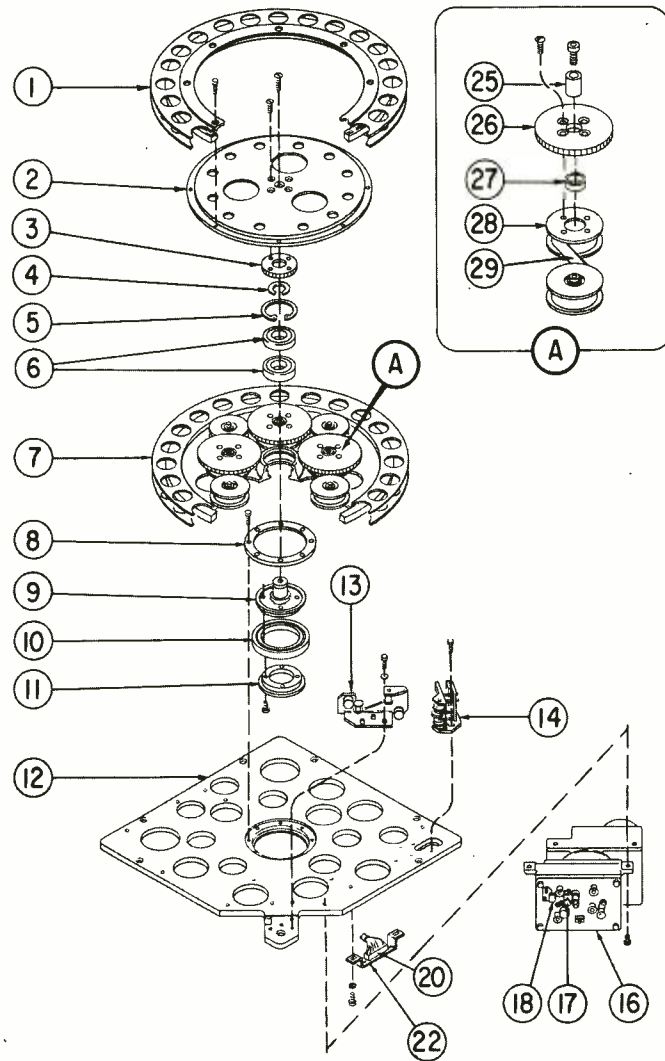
Tape transport assembly; all parts are mounted on a magnesium motor board.
